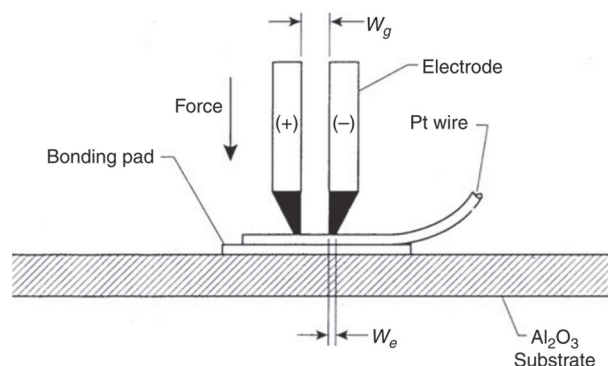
Thermo-compression welding procedure [Harm10].
